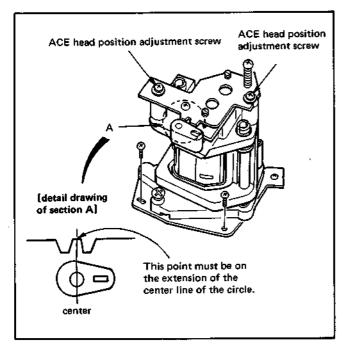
Position Adjustment of ACE Assembly (2)
